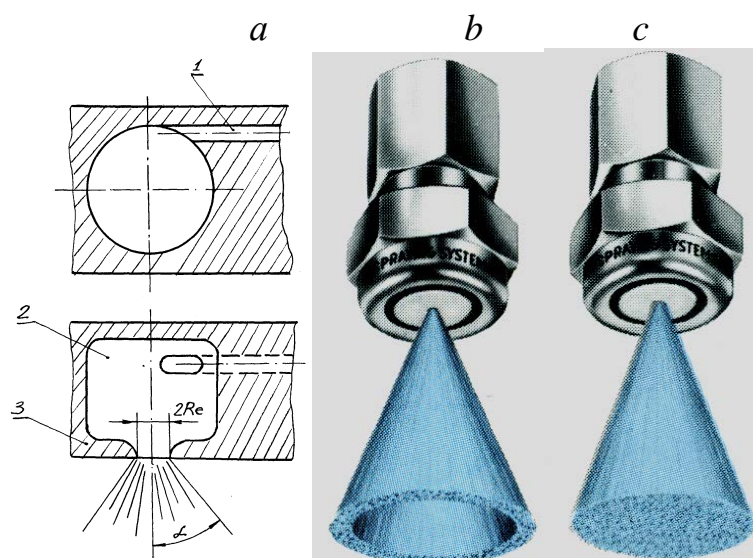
Centrifugal atomizer [6]: a) - a schematic representation: 1 – tangential inlet duct; 2 – camera twist; 3 – nozzle; b) – hollow cone spray pattern; c) – full cone spray pattern
